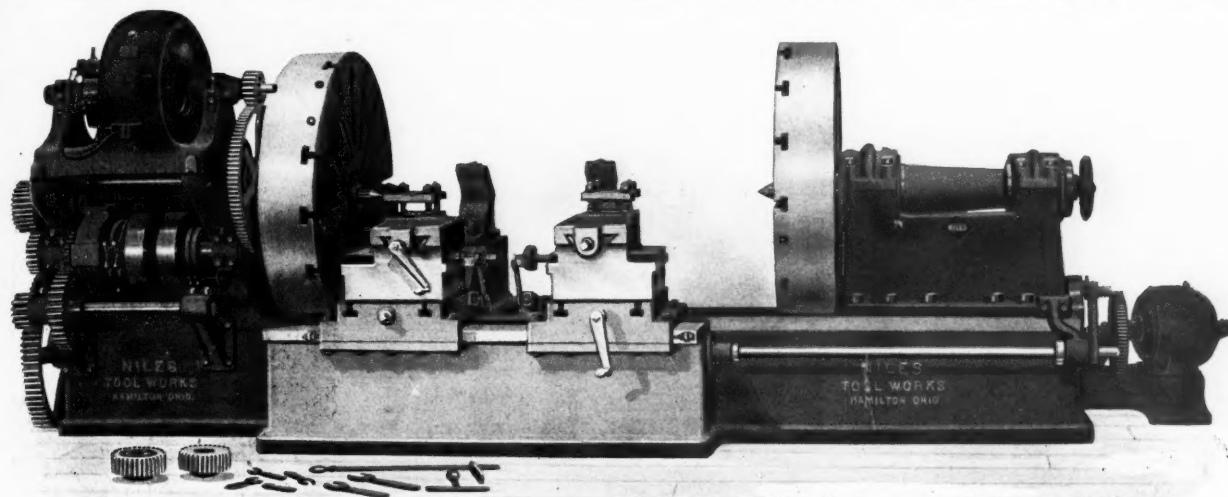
New Driving Wheel Lathe having Important Improvements.
